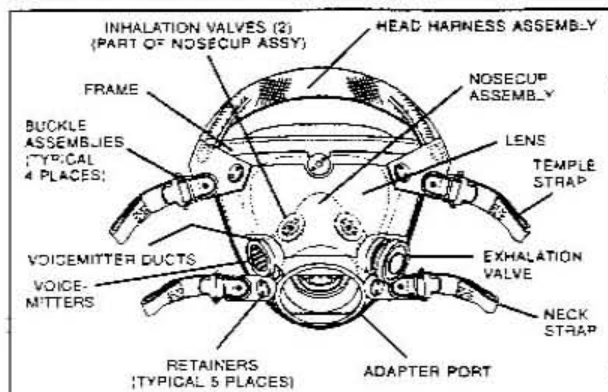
AV-2000™ MASK ASSEMBLY WITH EXHALATION VALVE
